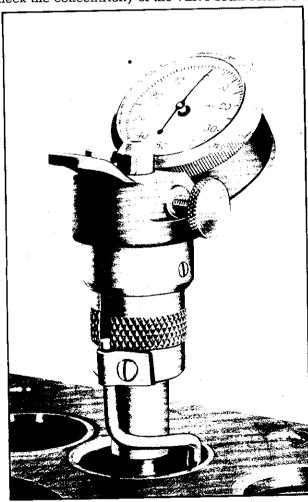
Determining Concentricity of Valve Seat with Valve Guide.
